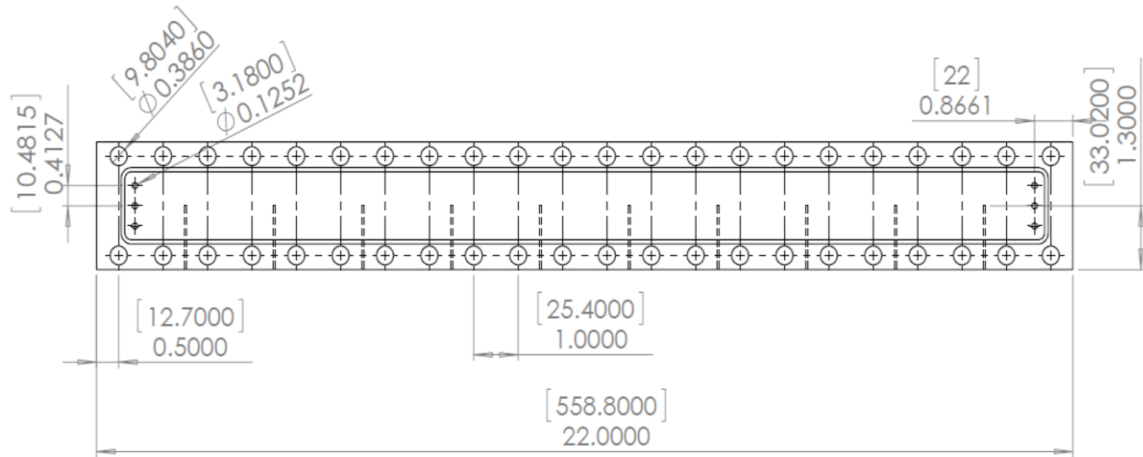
Drawing of the mating plate showing O-ring groove, bolt holes, holes for temperature and pressure measurements. The dimensions are in inches [mm]
